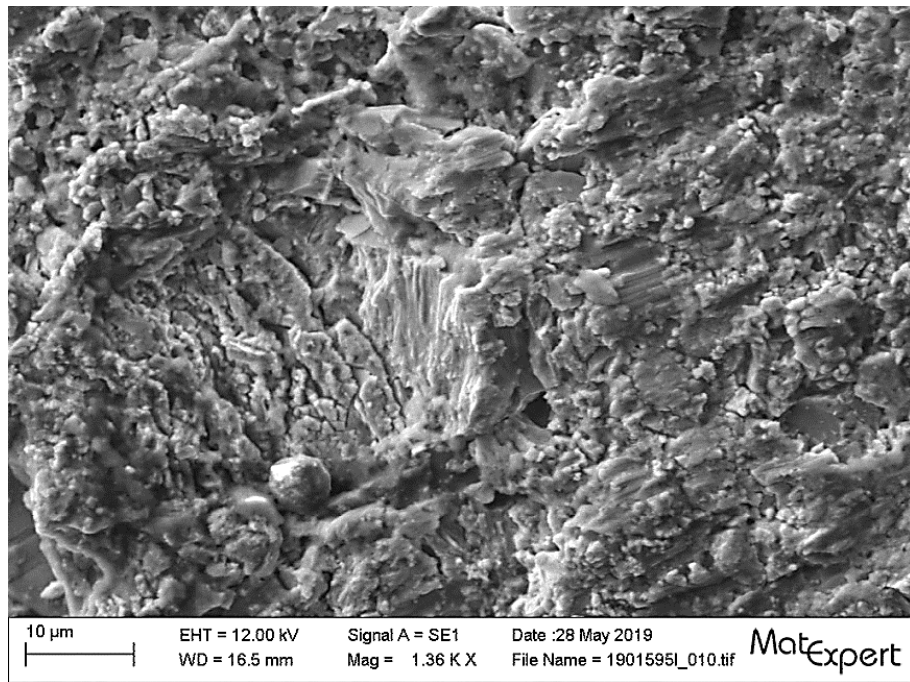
Fine, fatigue crack-like secondary cracks.
